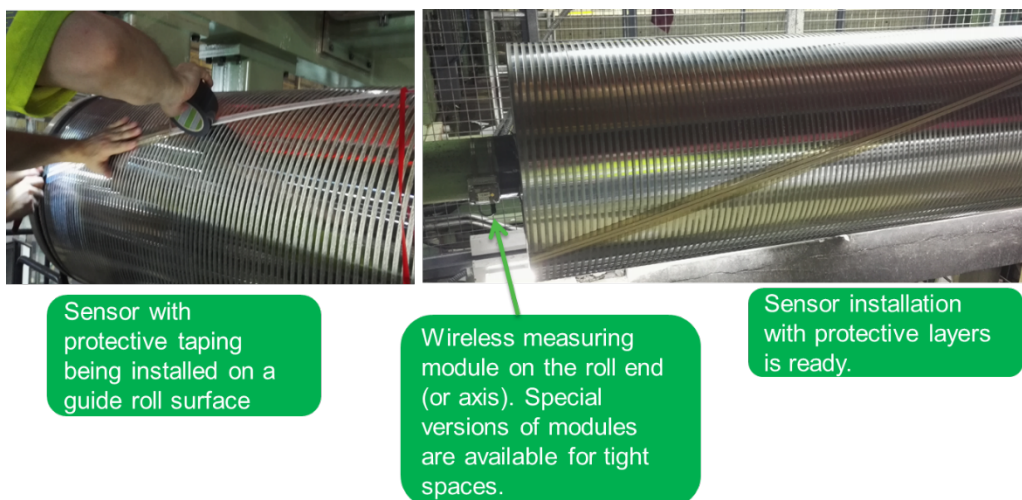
Installation of sheet temperature profile measurement system with “iRoll Portable” technology. This version of the measurement technology enables online process analysis and troubleshooting using temporary, installed sheet temperature profile measurement. The sensors can be mounted on several
